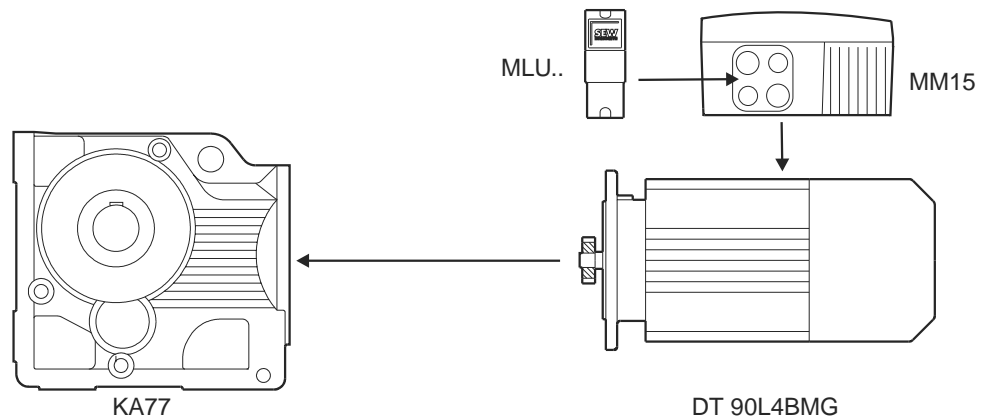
Example for the unit designation of a MOVIMOT® gearmotor
